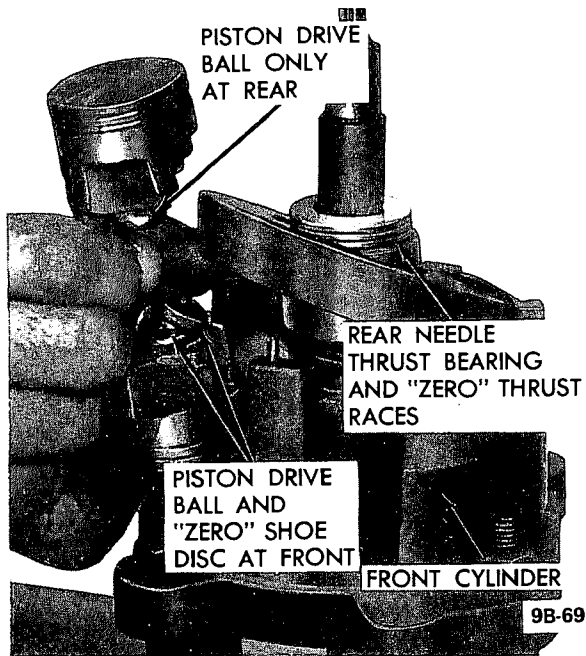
B-95 Installing Piston into Cylinder Half - 6 Cylinder Compressor
